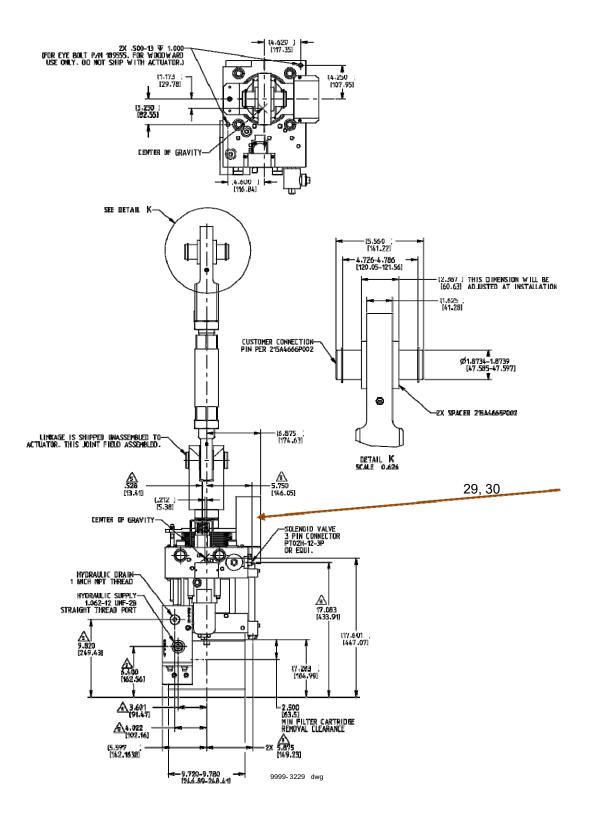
IGV Actuator with Electric Trip—Connector Version (front and top views)
